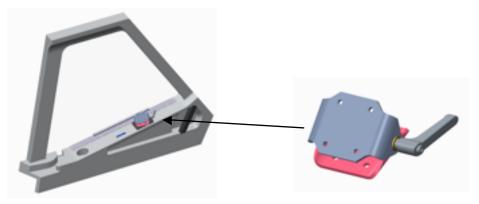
CAPTAIN'S SIDE WINDOW MODIFIED WITH EZMOUNT™ TILT (FIRST OFFICER'S INSTALLATION IS MIRROR IMAGE)
